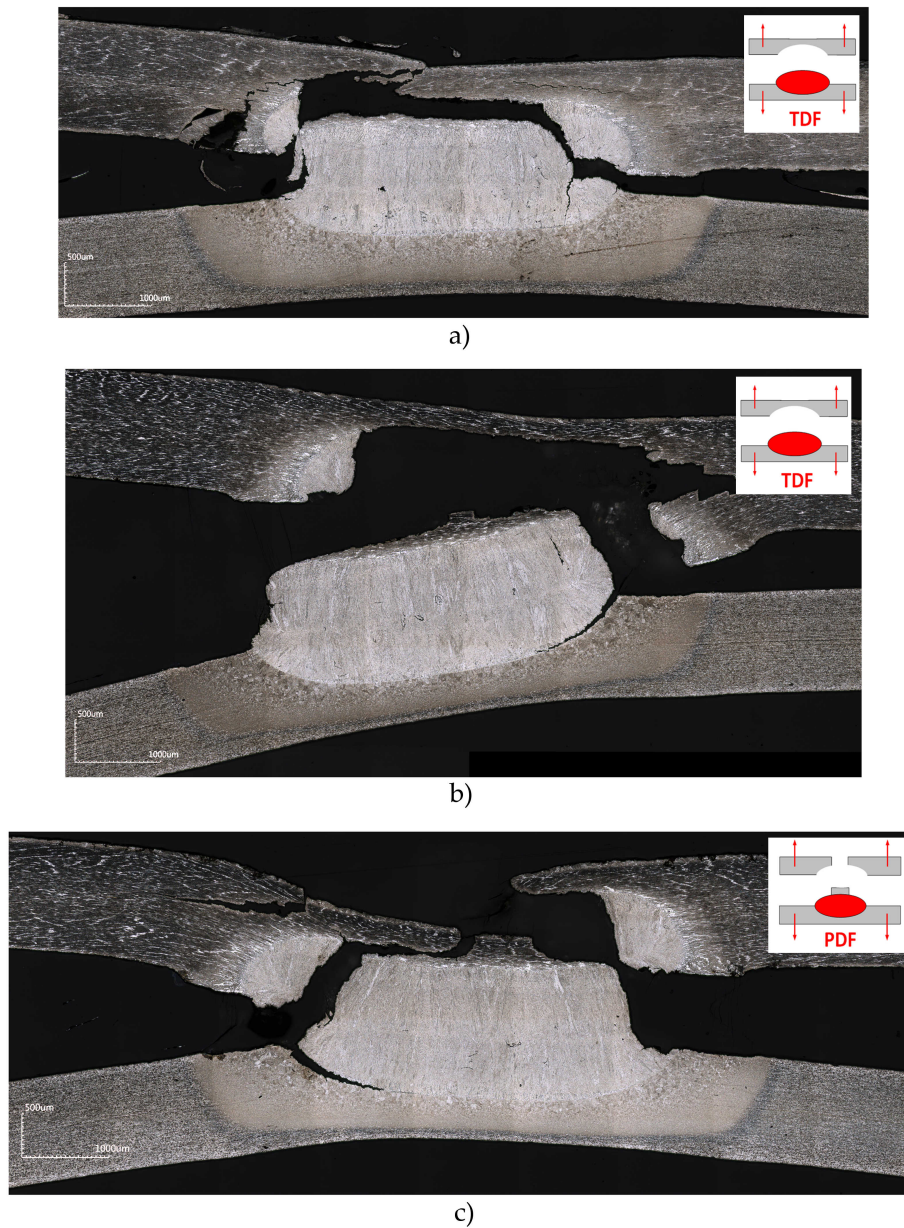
Spot weld cross tension failure modes of Duplex 4Al/DP600 spot welds for the three welding intensities: a) lower end, b) middle position, c) upper end.
